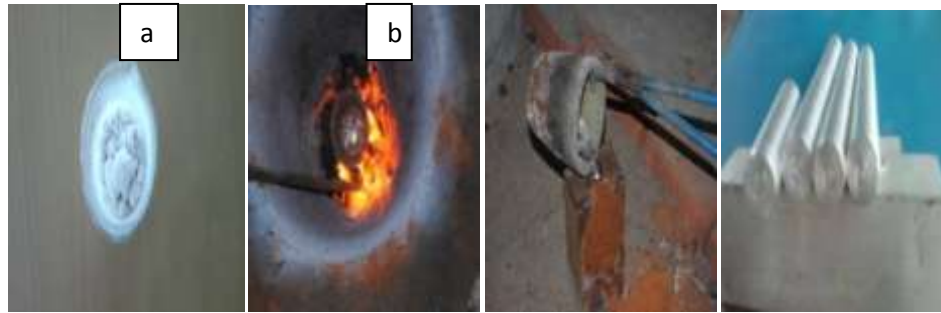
(a) Barium powder, (b.) mixing, (c) pouring to mould, (d) after machining.
